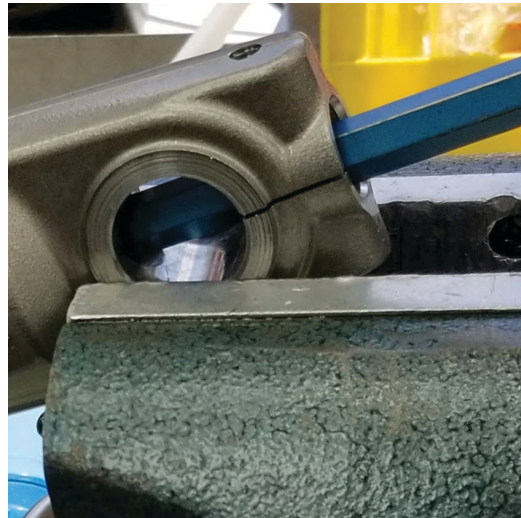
Clamp the lower portion of the fork to access the retaining screw.
